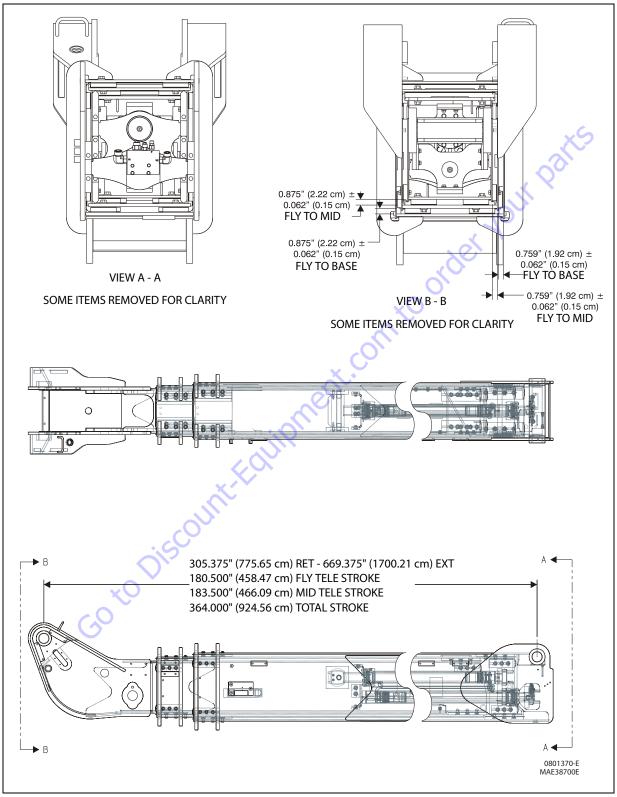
Tower Boom Assembly - Sheet 1 of 3
